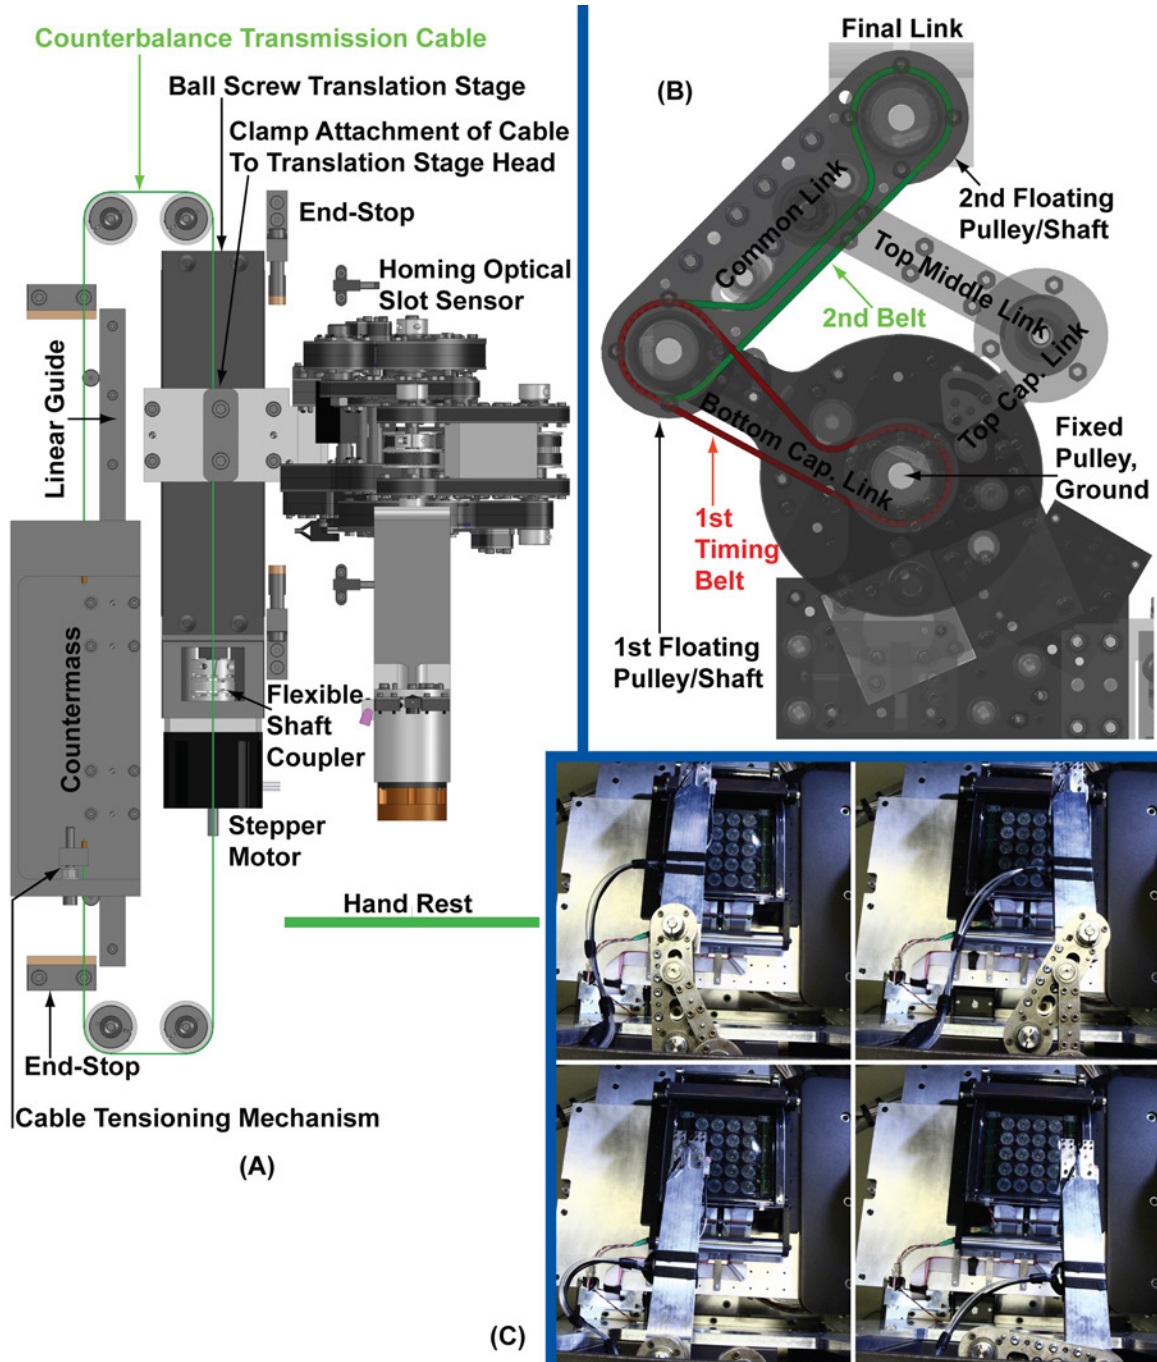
“AssistoBot-Arm”: Design Details of the Z-Axis and Final-Link Parallelism Mechanism. A: Z-axis details. B: Final-link parallelism mechanism, links and belts configuration. C: Demonstration of final-link parallelism mechanism. The final-link remains parallel to the patient’s arm and maximally distanced from the Needle Driver over the entire workspace. The special arrangement of belts and pulleys in Subfigure B is what enforces this parallelism.
